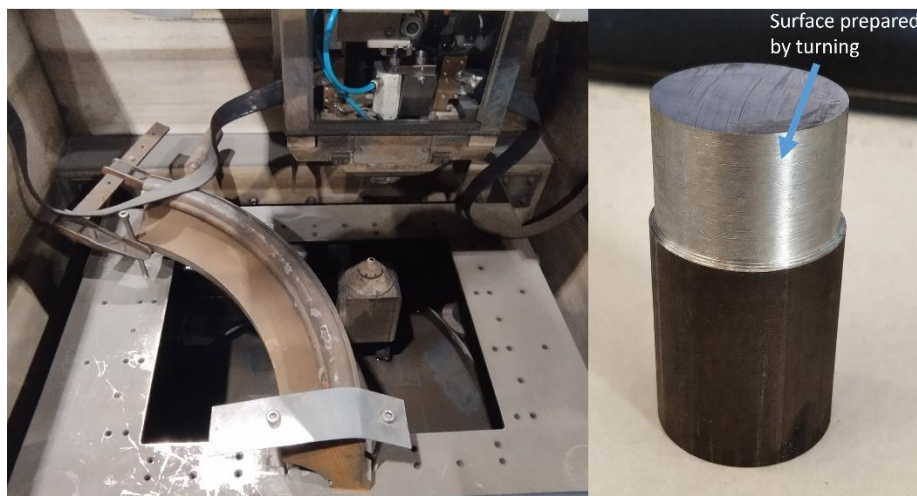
Cylindrical specimen preparation. Left) wheel cut by EDM Right) turning of the surface for posterior material deposition process
